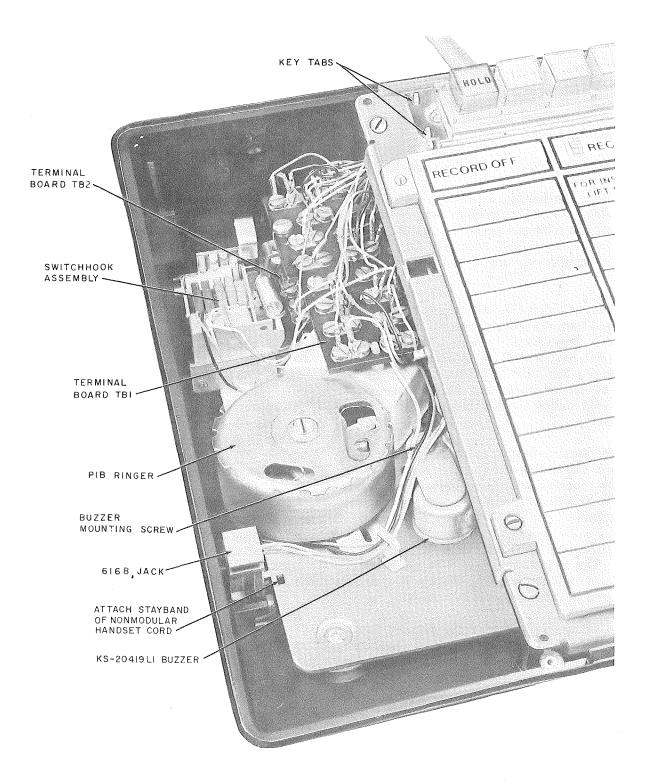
Telephone Set With Faceplate, Upper Housing, Handset, and Handset Cradle Removed
